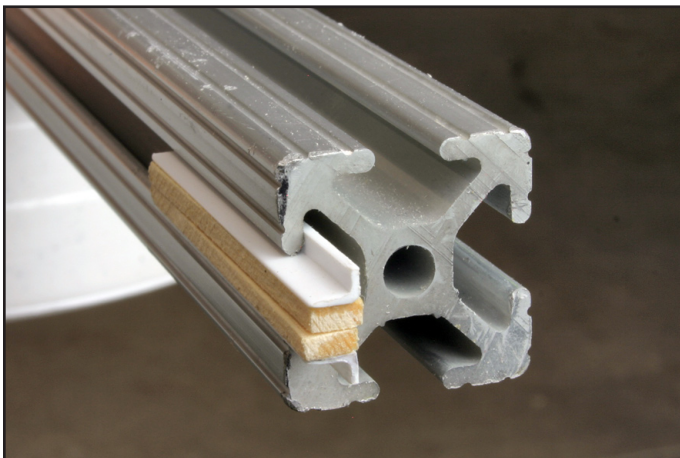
Test fit the runners in the rail, and sand the wood as necessary to adjust the fit so the runners slide easily.
